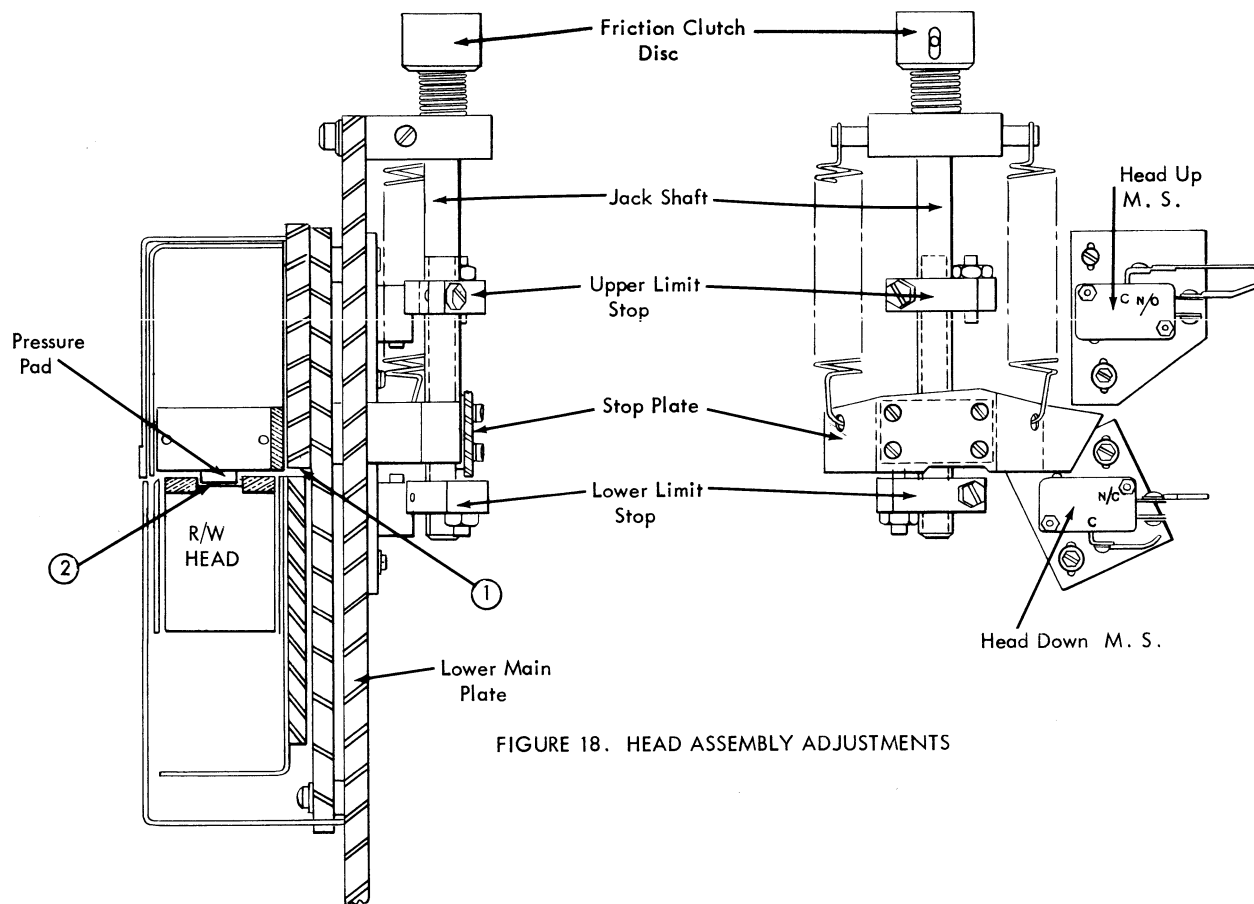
HEAD ASSEMBLY ADJUSTMENTS
